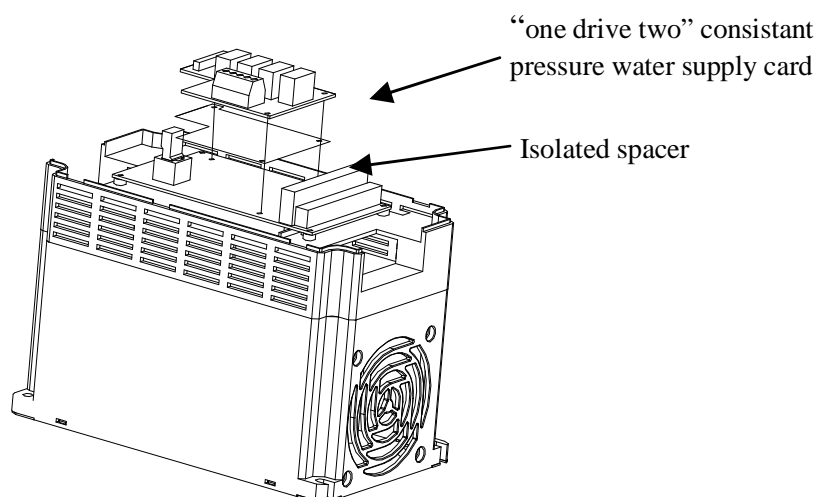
“one drive two” consistant pressure water supply assembly drawing
